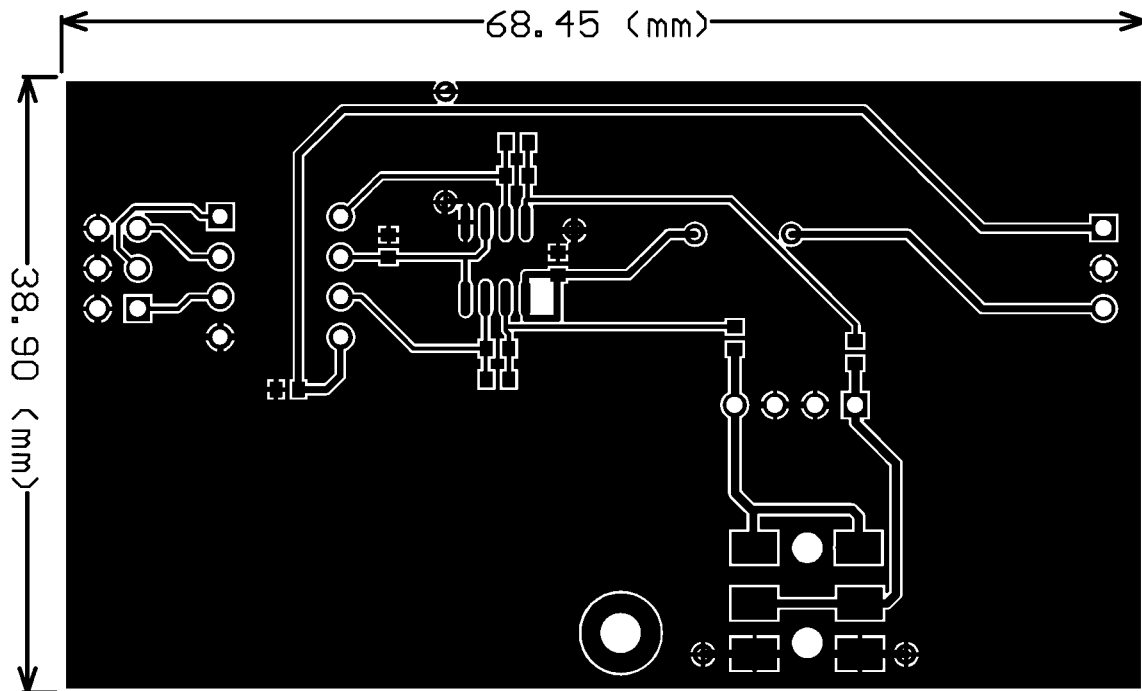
Bottom layer LMV1022 / LMV1023 demo board
